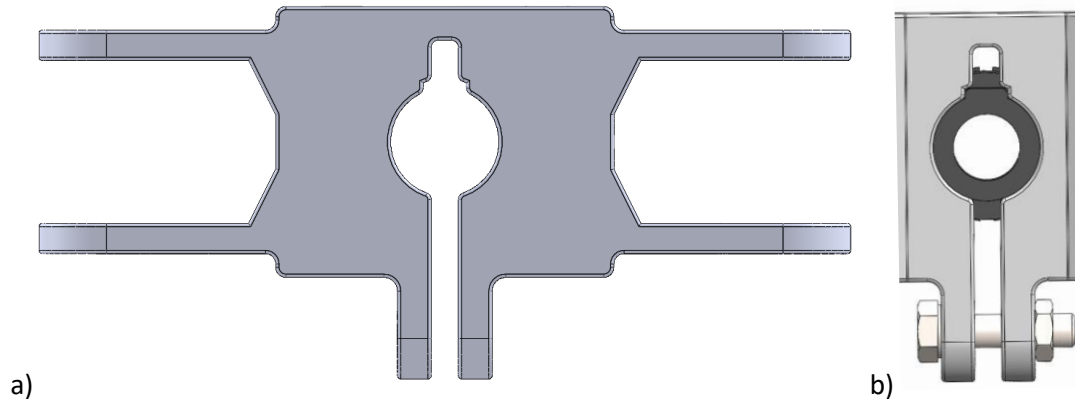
Coupler and smallest tube assembly: slot geometry (a), and complete assembly (b)
